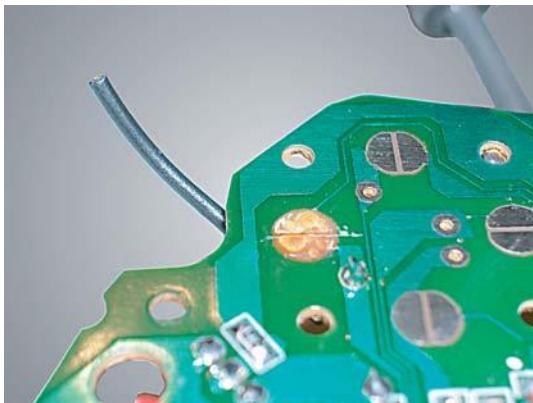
Showing the ruined contact. The solder point is to the bottom right, beneath the ruined contact, and has a wire soldered to it.
